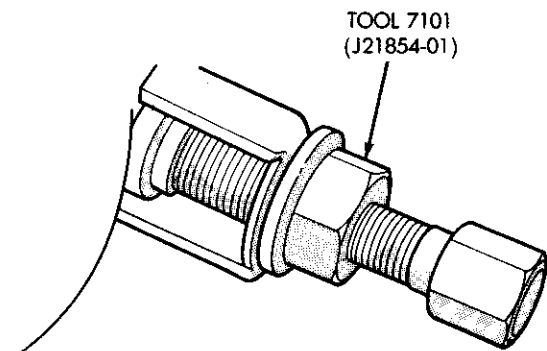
Pivot Pin Removal Tool 7101 (J21854-01)
